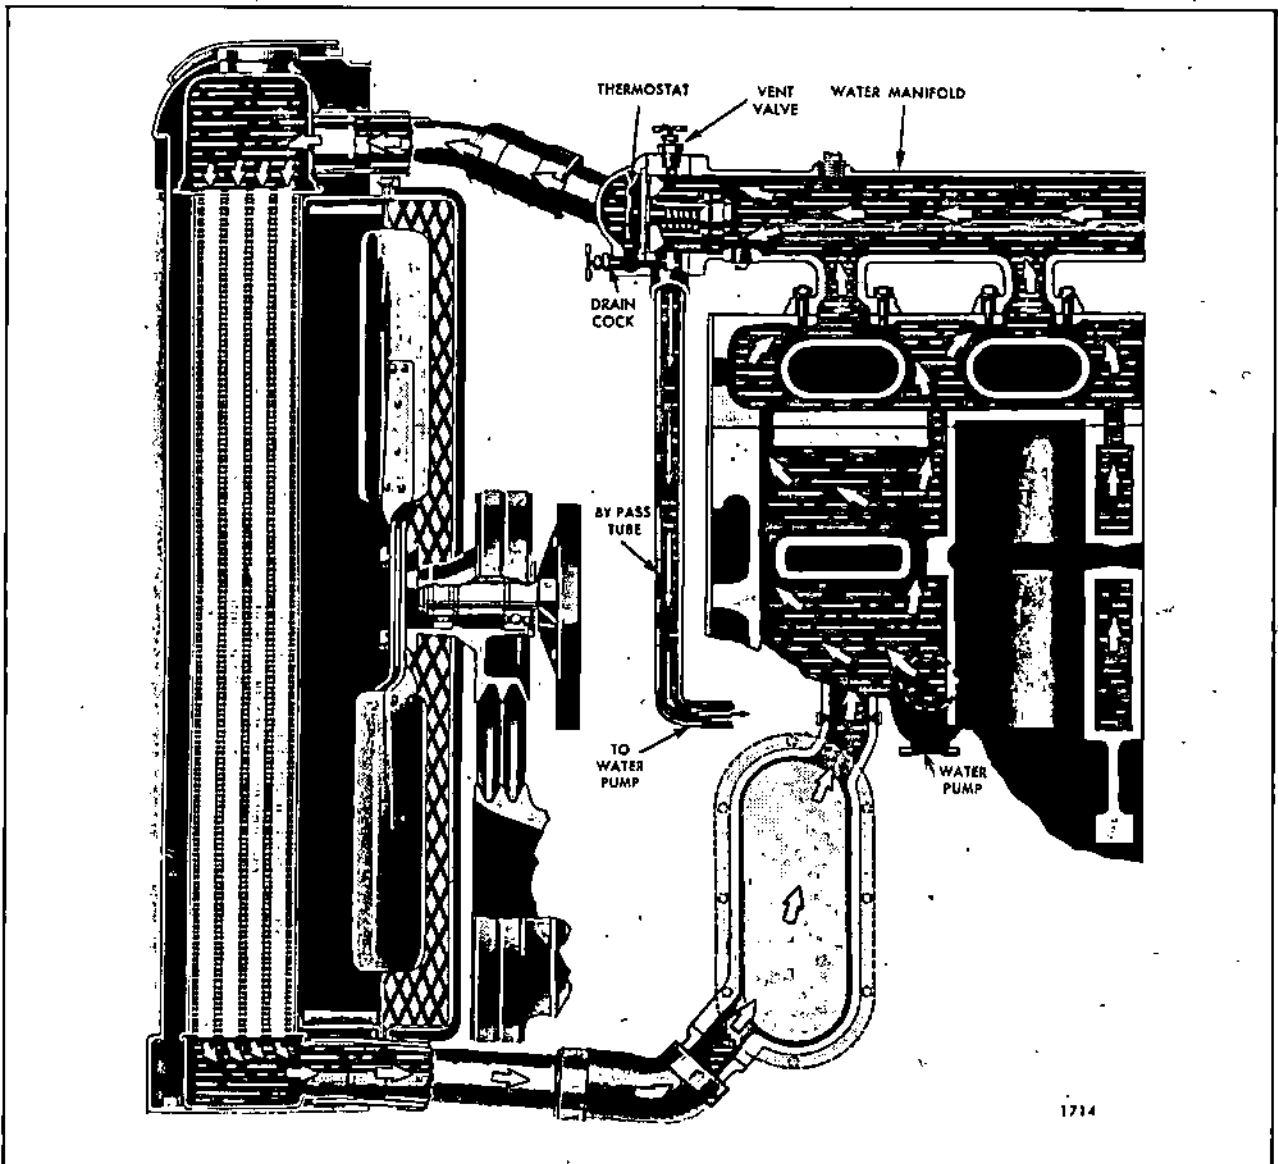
Typical Engine Cooling System with Radiator and Fan
